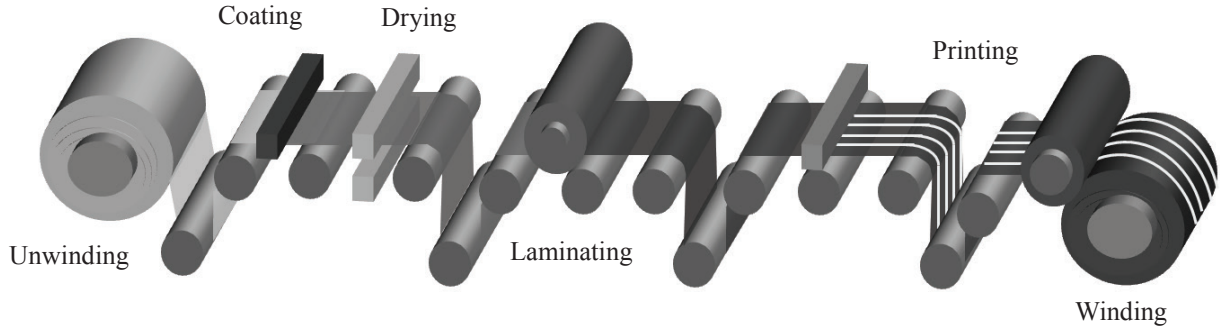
Roll-to-Roll-Printed-Electronics (R2RPE) manufacturing system
